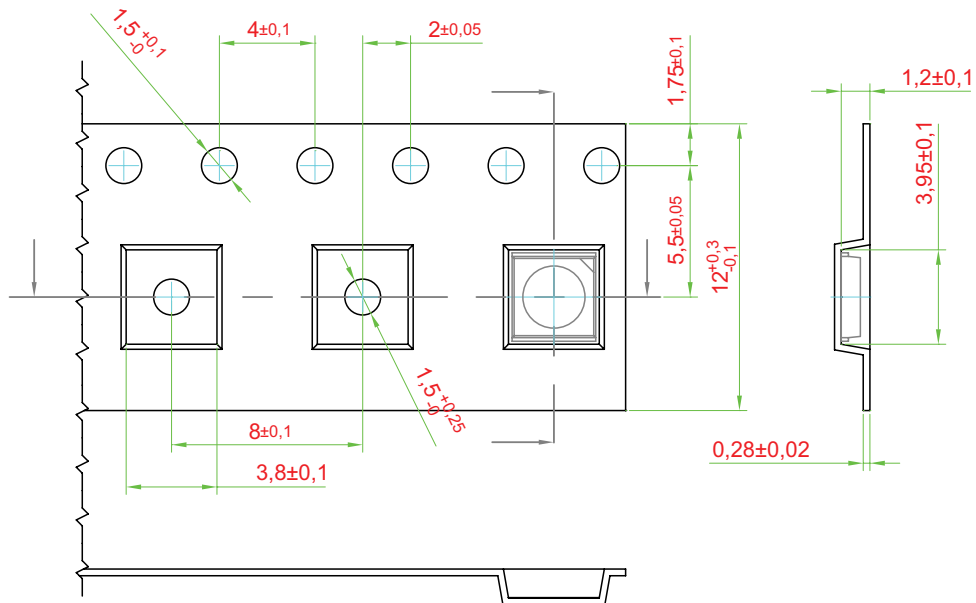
Pocket tape dimensions for LUXEON 3535L Line.
